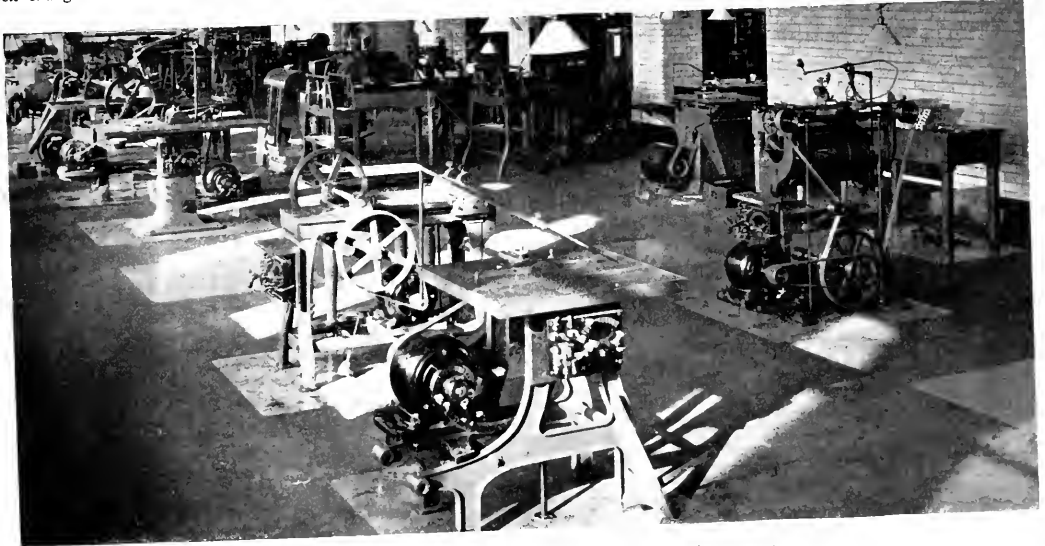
GENERAL VIEW OF ELECTROTYPE FINISHING APPARATUS.
